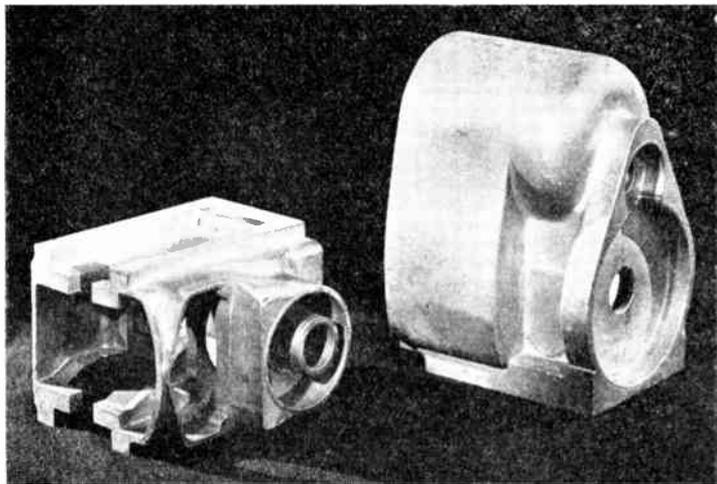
SHOWING A DIE FOR MAGNETO CARCASES CAST IN ALUMINIUM ALLOY. (*Messrs. Die Castings, Ltd.*)
